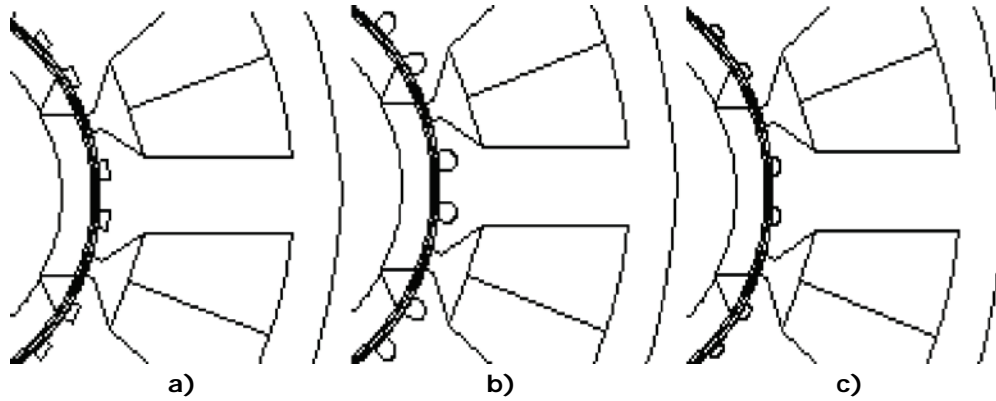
Different types of stator tooth notches: a) rectangular, b) U-shaped and c) semicircular [20]
